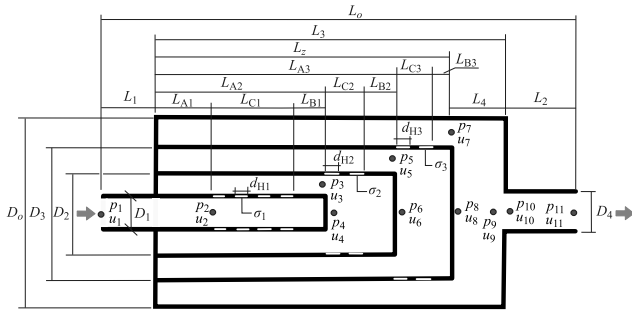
The outline dimension of muffler C equipped with three layers of diffusers.
